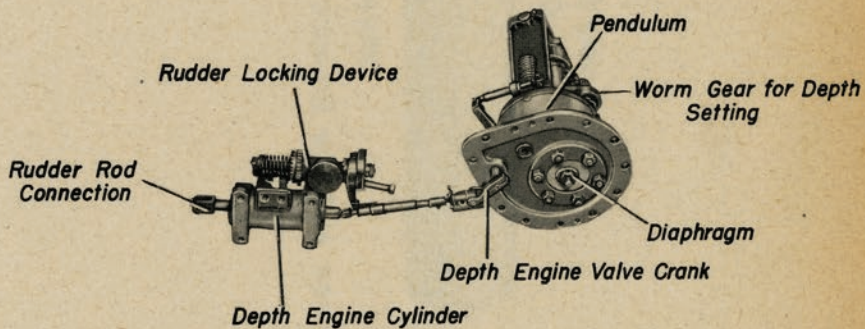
Torpedo Type 91 Mod I, Depth Mechanism
